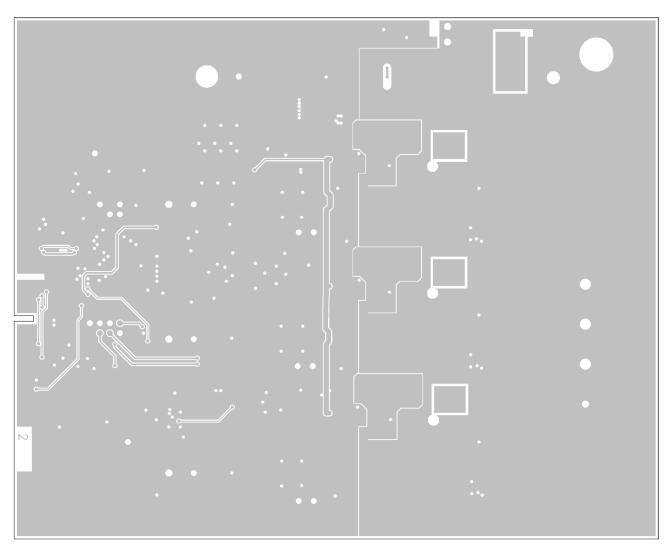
EPC7C021/EPC7011L7 3-Phase Motor Driver Eval. Board Inner Layer 1 Copper Etch (1 oz).
